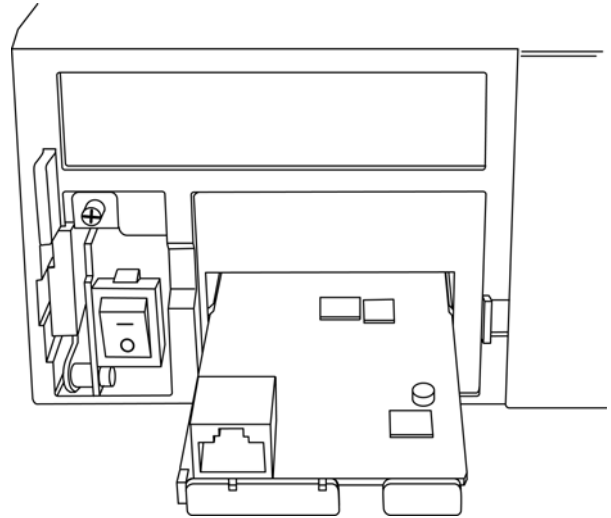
Installing PZ-BS11 Blade in Expansion Chassis
